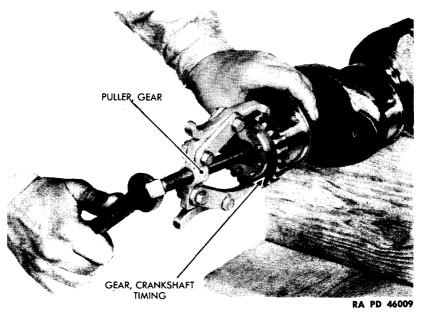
Removing Crankshaft Timing Gear from Crankshaft
